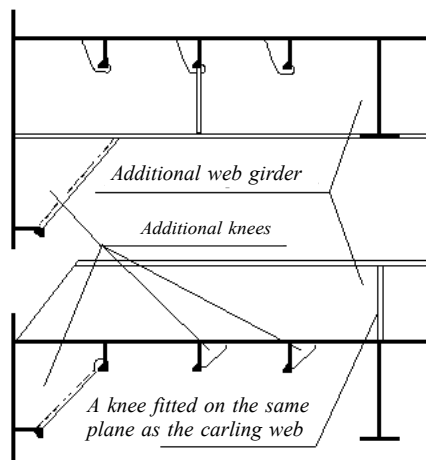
Strengthening of main framing girders with web girders
